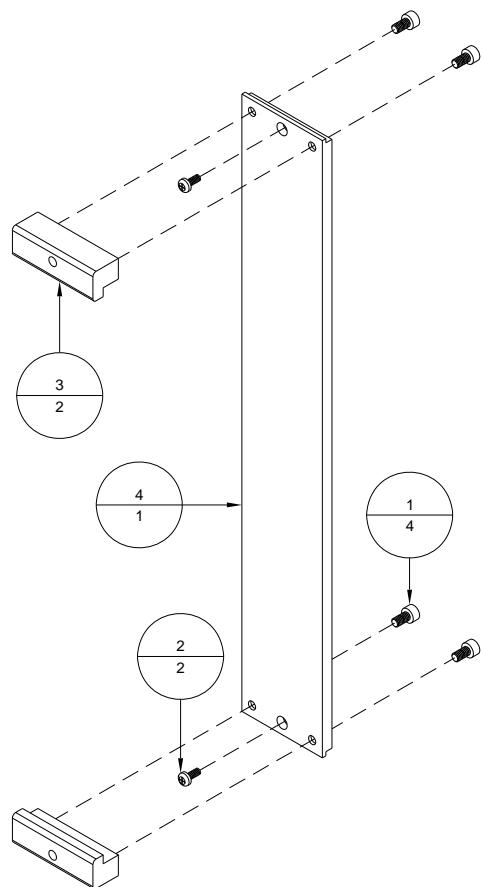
9103455A – Cover Assembly, Blind Card
